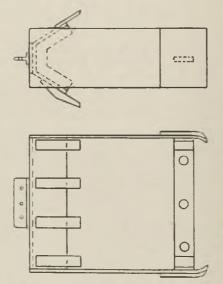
QUINCEY REVERSIBLE SCRAPER.
